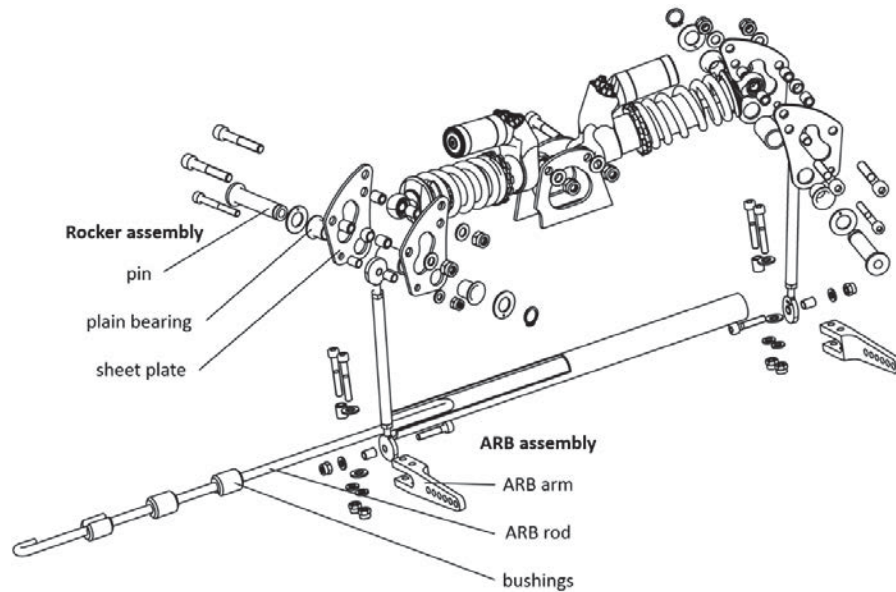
22 Dragon 3 Rear suspension assembly exploded view. Each part is described in detail
